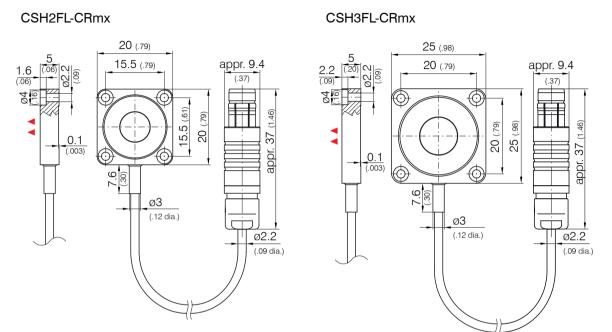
Flat sensors with integrated cable, measuring range 2 and 3 mm nominal
